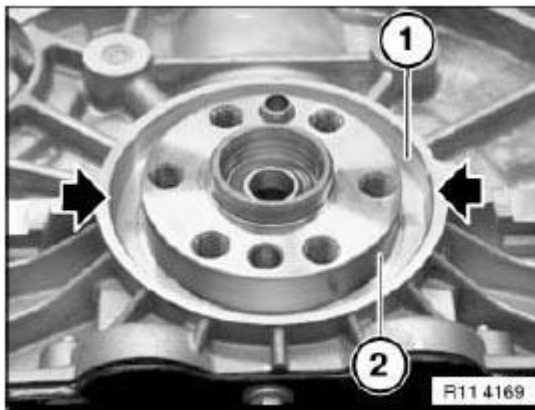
Identifying Sealing Cleaning Area And Radial Shaft Seal Running Surface Area
